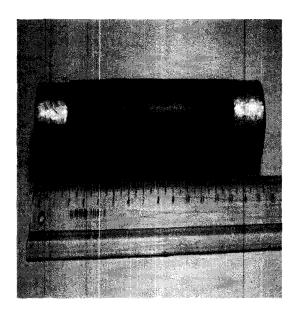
Bi 2212 based tubes with a silver electrode fabricated by centrifugal forming process (dimension: 30 mm x 150 mm x 23 mm).
